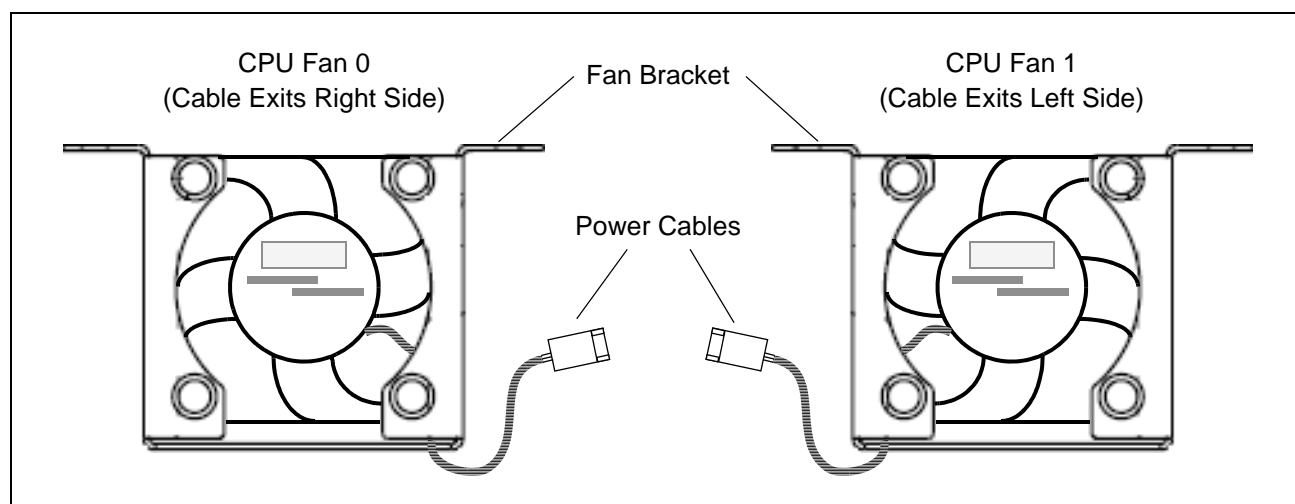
CPU Fans, Distinguished by the Side on Which the Power Cable Exits
